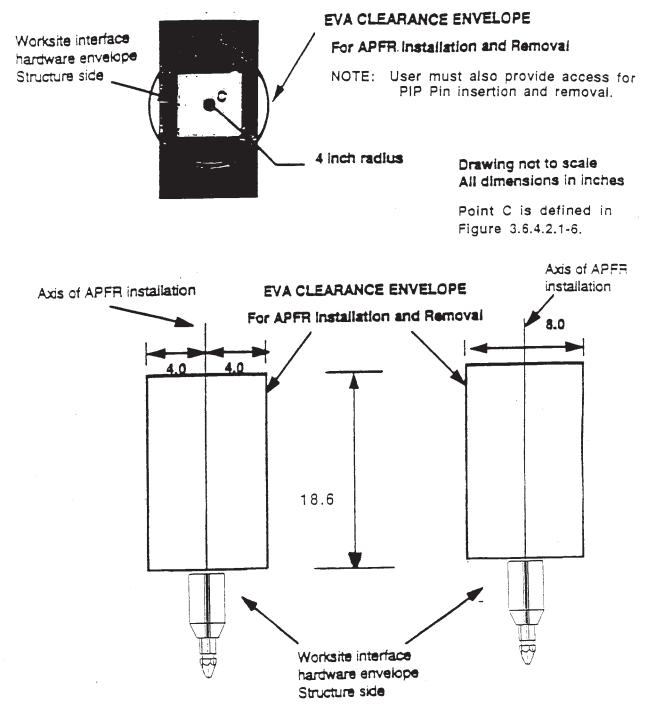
APFR INSTALLATION/REMOVAL EVA CLEARANCE ENVELOPE – WIF PASSIVE ADAPTER
